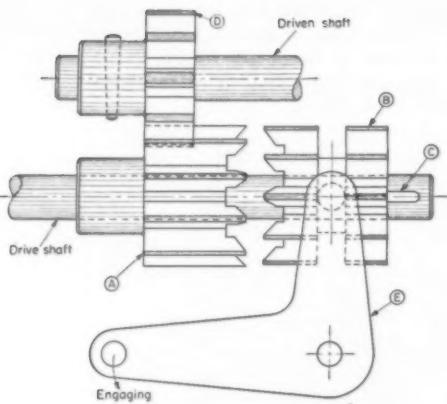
Simple jaw clutch manufactured from standard pinion gear stock with counter-bore on the pitch circle to achieve a precise grip and countersunk 90 degrees to provide piloting means.
